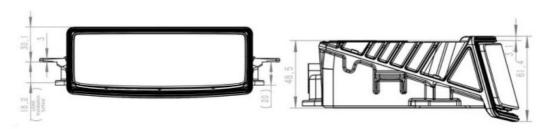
Front view (left) & side view (right) of the device(unit: mm)
